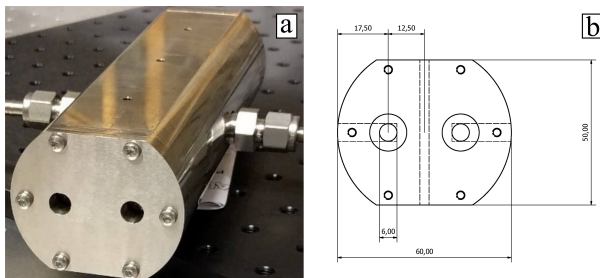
Panel (a): The Invar cavity assembly before being equipped with temperature probes and mounted inside the aluminium oven. The plates screwed into the spacer at its short ends press the mirrors, via O-rings, onto the spacer. Panel (b): A schematic drawing of the cavity assembly. Units in mm. Reproduced with permission from Ref. [48].
